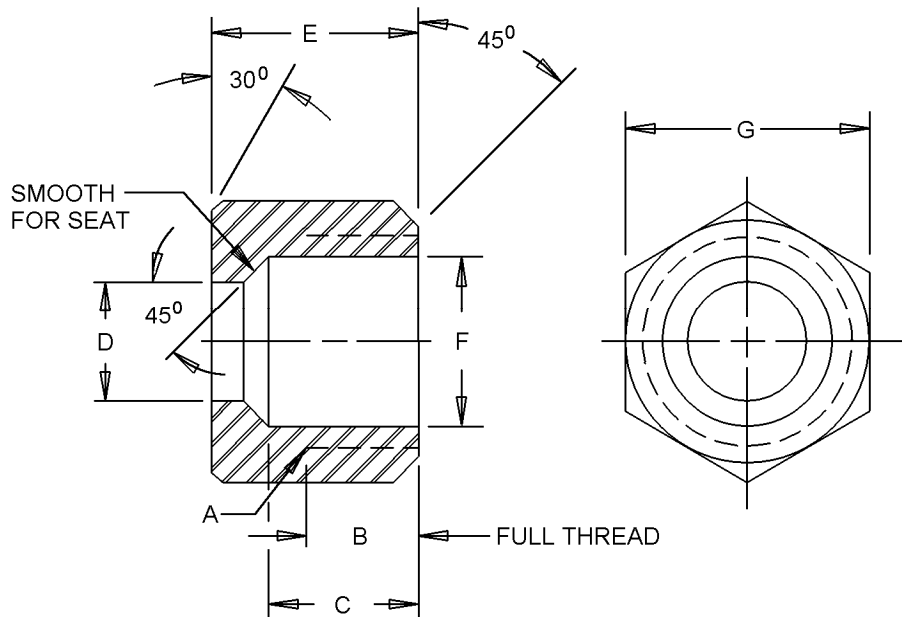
Nuts, tube coupling – safety sleeve compression type.
